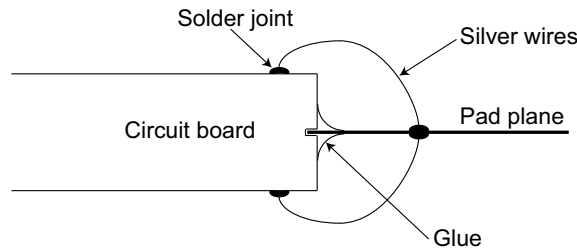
Lateral view of the pad-plane fixing to the circuit board.
